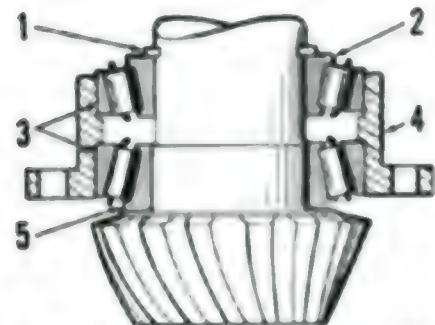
View showing bearings on bevel pinion shaft of Model Hydro 64.
